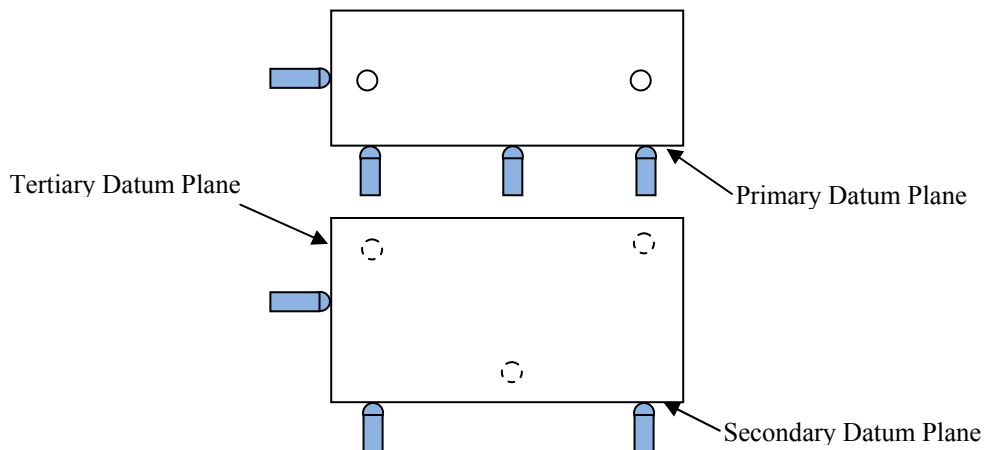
The workpiece is located on fixtures with 3-2-1 approach.
